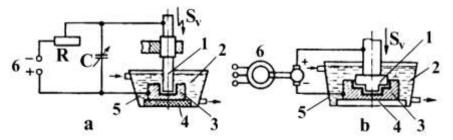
Electric spark (a) and electric pulse (b) machining: 1 – tool (electrode); 2 – dielectric liquid; 3 – workpiece; 4 – dielectric bottom; 5 – container; 6 – impulse generator; R – electric resistance; C – condenser
